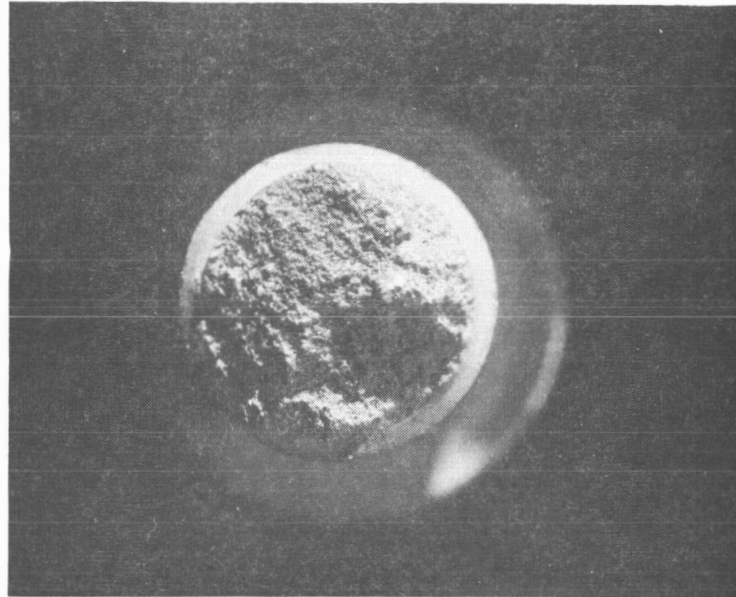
FRACTURE SURFACE, SPECIMEN 5, 8X
